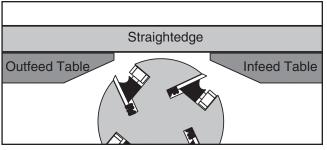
Infeed and outfeed tables set evenly (knife-style cutterhead shown).
